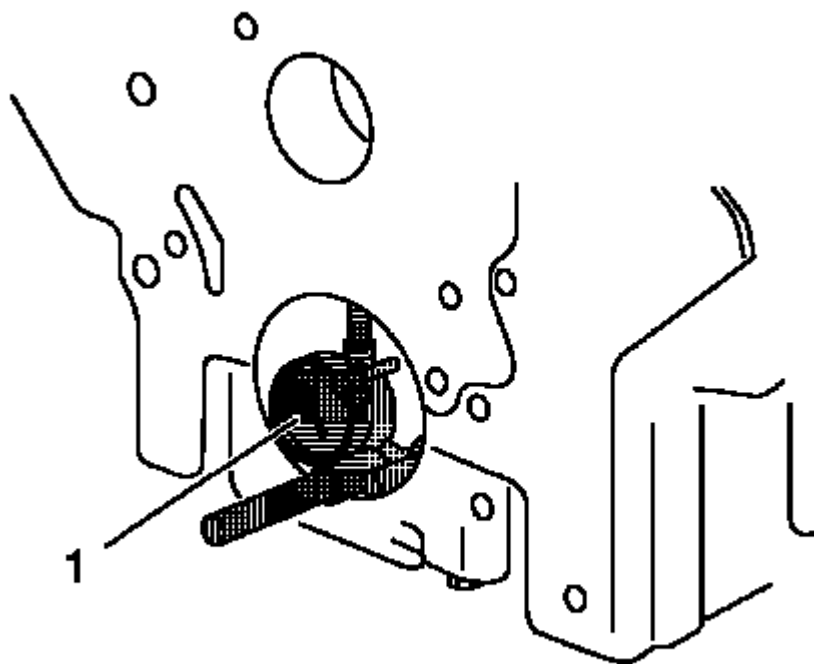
Measuring Bearing Bore Concentricity And Alignment Using Gauge Tool
